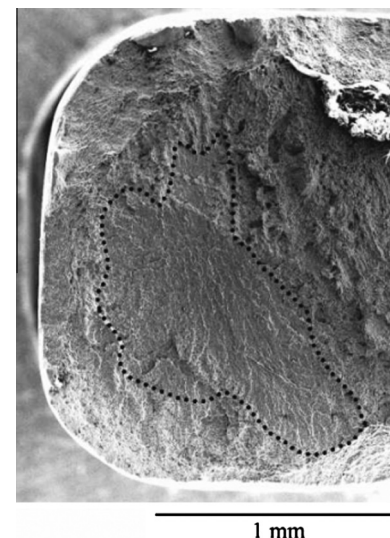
Dwell-fatigue fracture surface, faceted initiation site marked by a dashed line, after [13].
